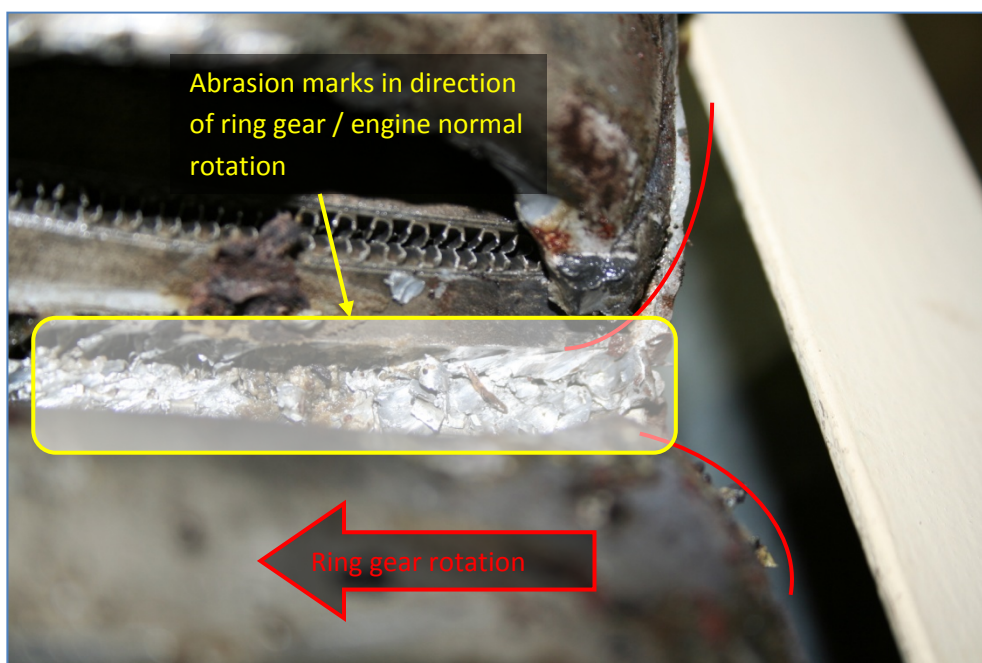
Static ring gear teeth imprint on the engine oil cooler
